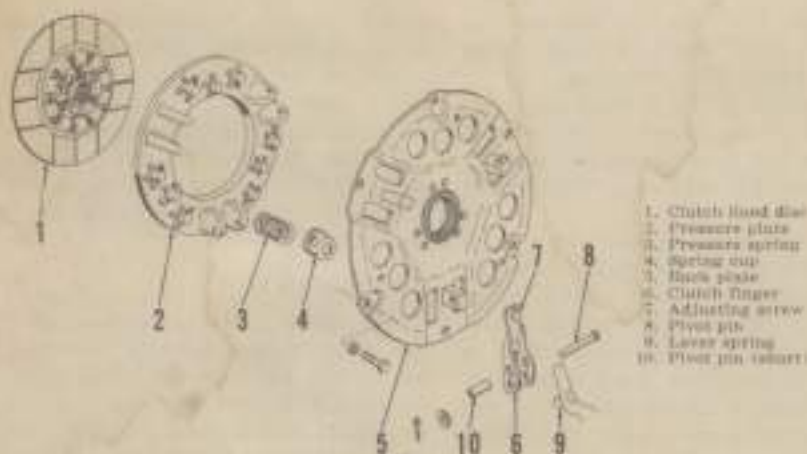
Exploded view of the clutch assembly used on D-17 tractors prior to Serial No. D17-75001. Clutch used on D-14 and D-15 models is similar.
